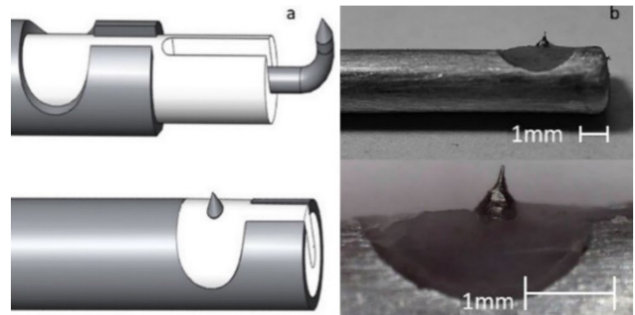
(a) 3D model of the construction of the side probe with the inner conductor replaced with a sharp right-angled tip, before being filled with paraffin wax; (b) photograph of a side probe made using RG405 coaxial cable.
